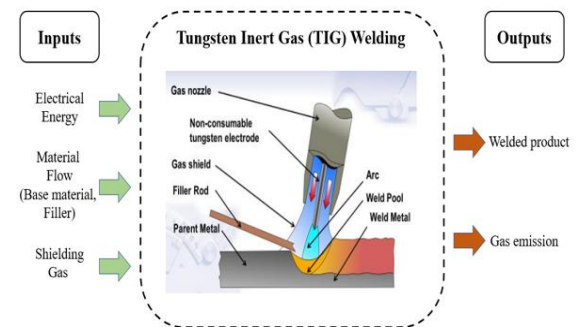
System boundary of the LCA study related to the welding of aluminium using TIG process [courtesy: TWI]
